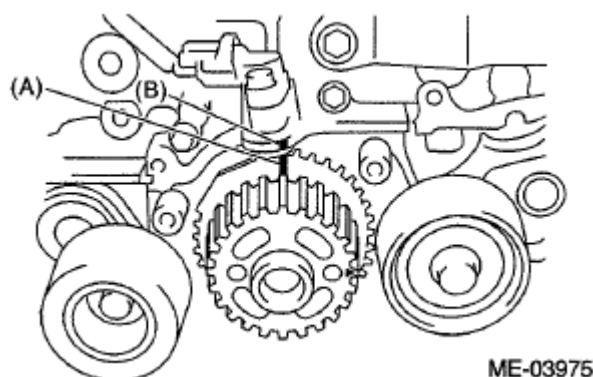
Aligning Mark On Crank Sprocket With Mark On Oil Pump
